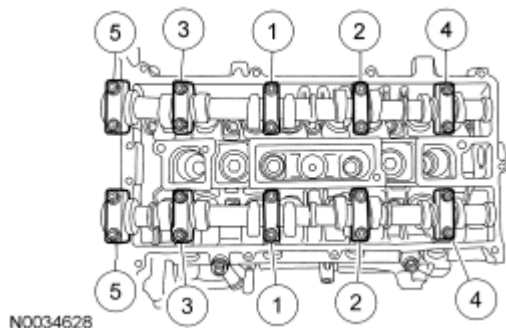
Identifying Camshaft Bearing Cap Bolts Tightening Sequence
